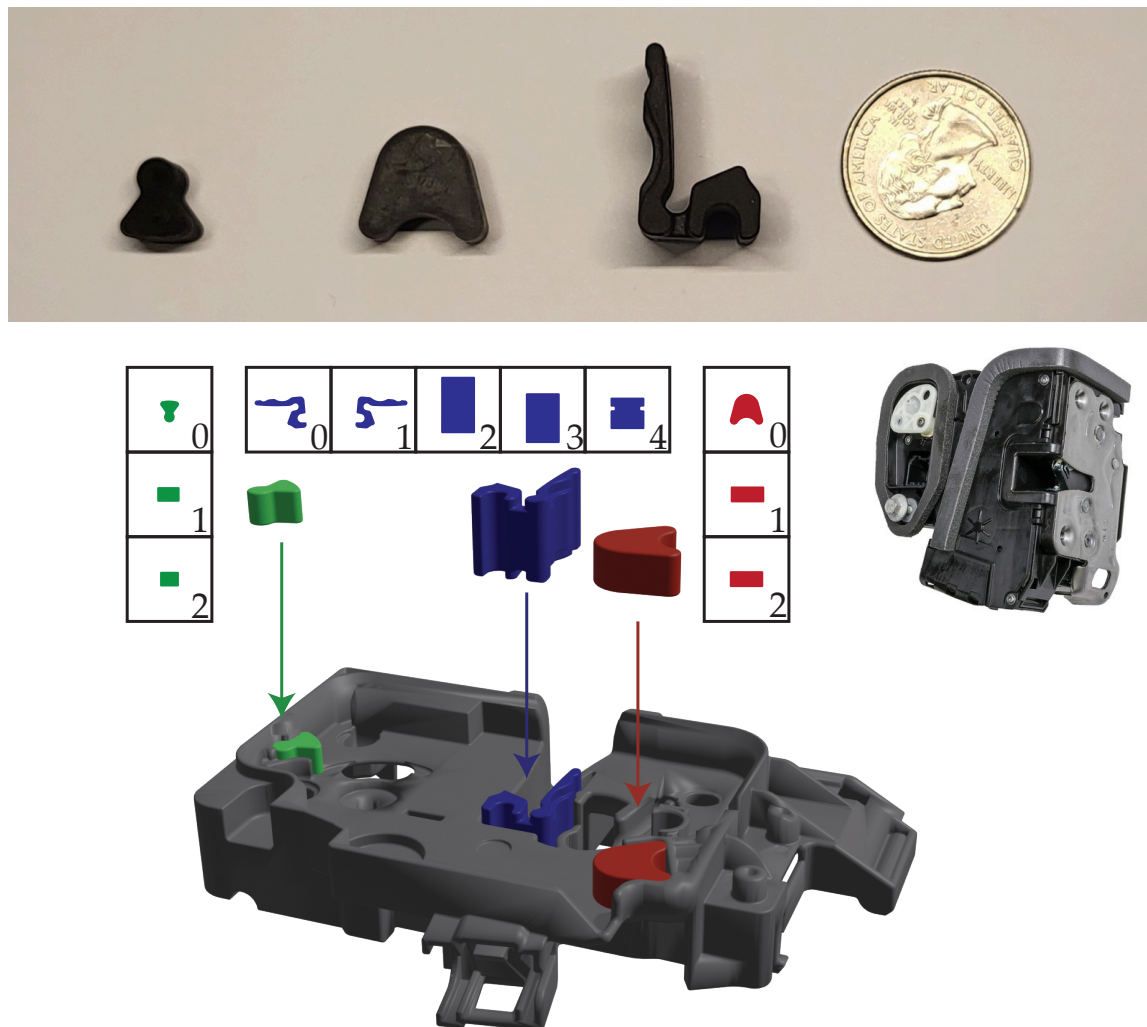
Top: (left to right) Small Bumper, Medium Bumper, Large Bumper, and a US quarter for scale. Bottom: The assembly task discussed in this work. The part shown on the top right is an automotive door latch. Three rubber parts need to be inserted into the housing (black): small bumper (green), medium bumper (red) and long bumper (blue.) The top-view of the stable poses is shown in the figure. Pose 0 for all objects is considered as the assemblable pose.
